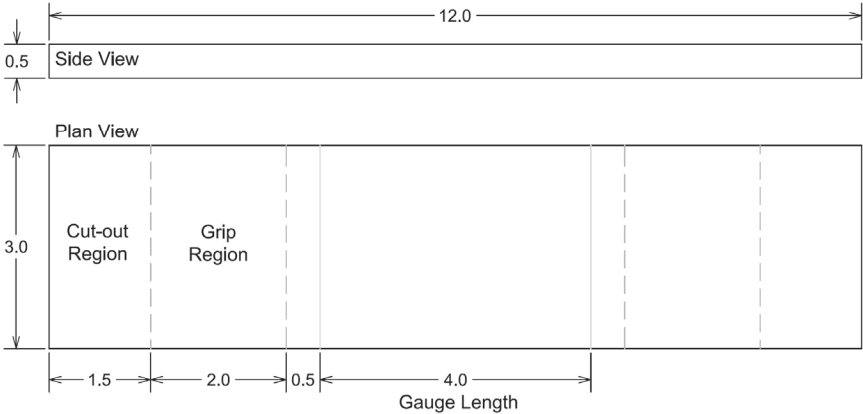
Coupon specimen geometry for tensile testing of COR-TUF
